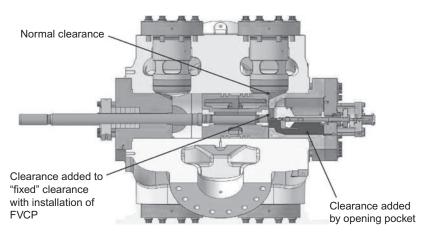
Sectional view of a pneumatic fixed volume clearance pocket.
